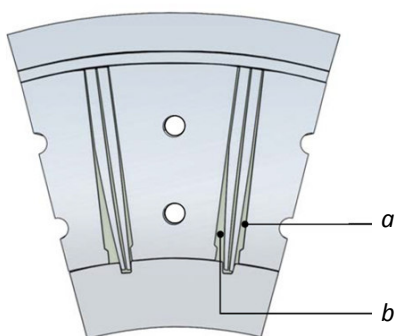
Elastic and hydraulic damping in a spring damper [4]:
